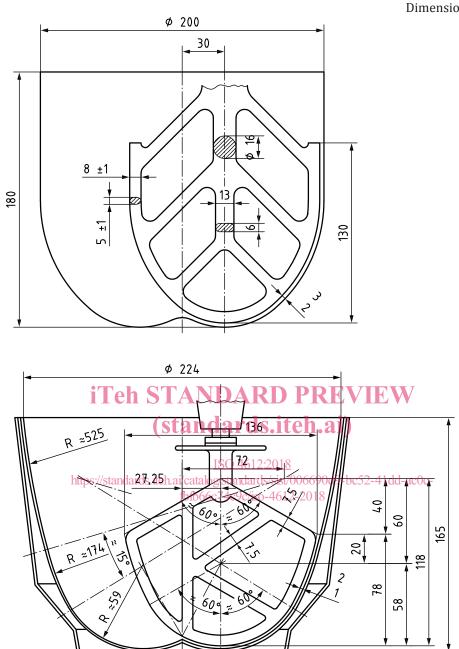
Configurations of typical planetary-mixer bowls and beaters
